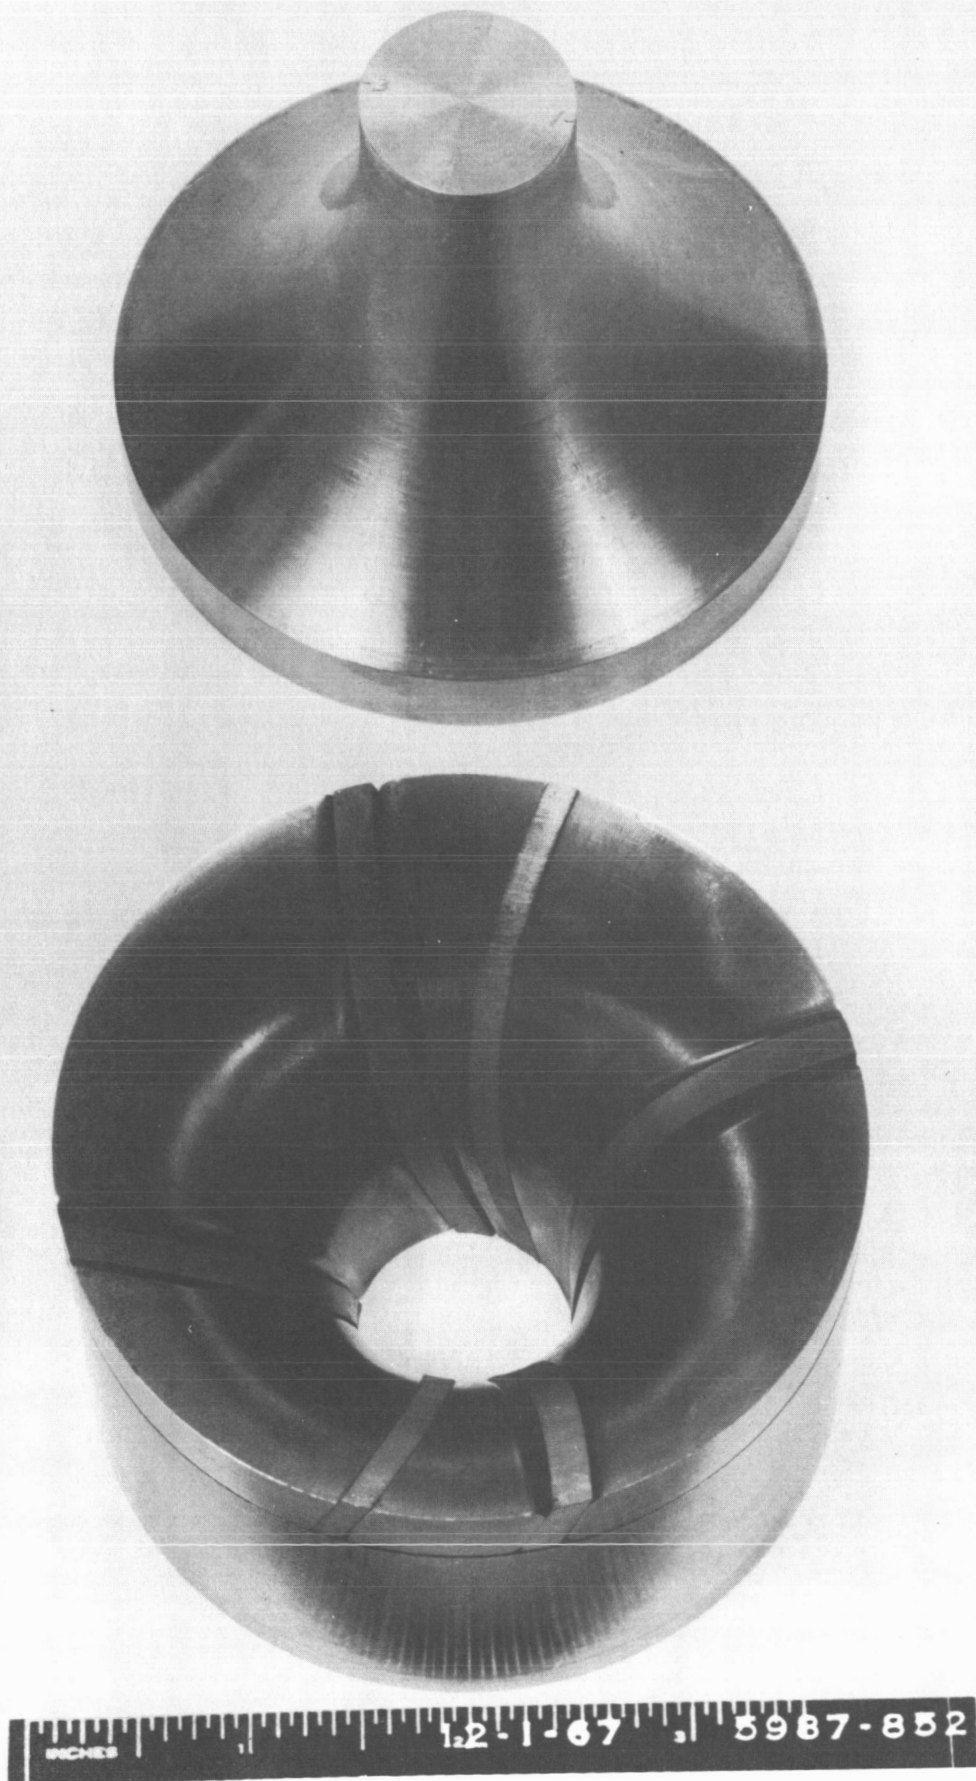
Partially Assembled View of Second Trial Sample Showing Modified Core
